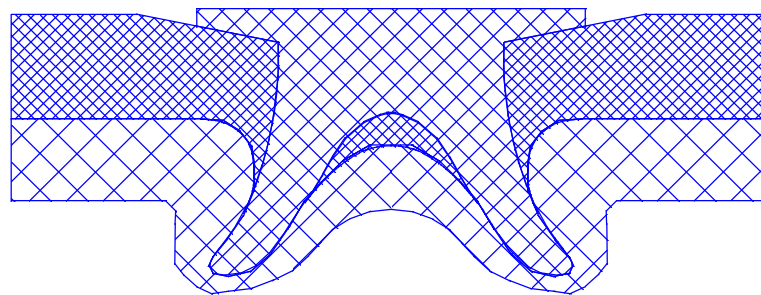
Cross section of a joint formed with a self-piercing fastener
